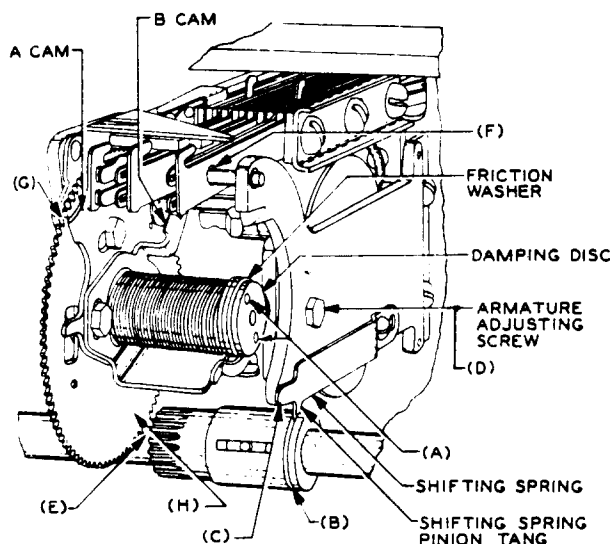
Engagement of Shifting Spring Tang and Pinion
